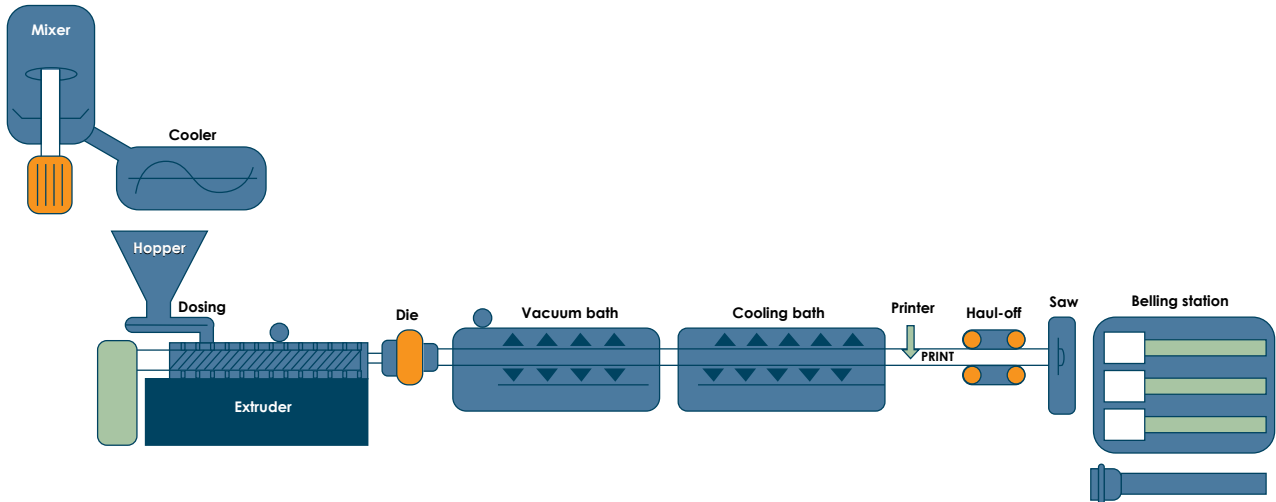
LAYOUT OF A PVC PIPE EXTRUSION PLANT
